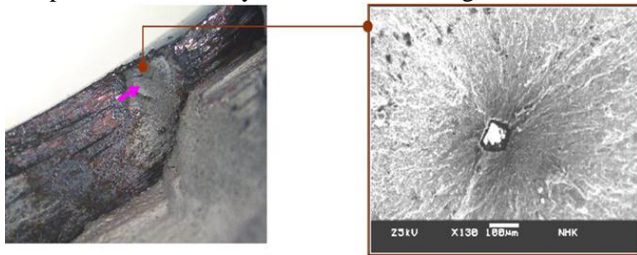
Fracture surface of a coil that failed early due to an inclusion and Its SEM appearance.
